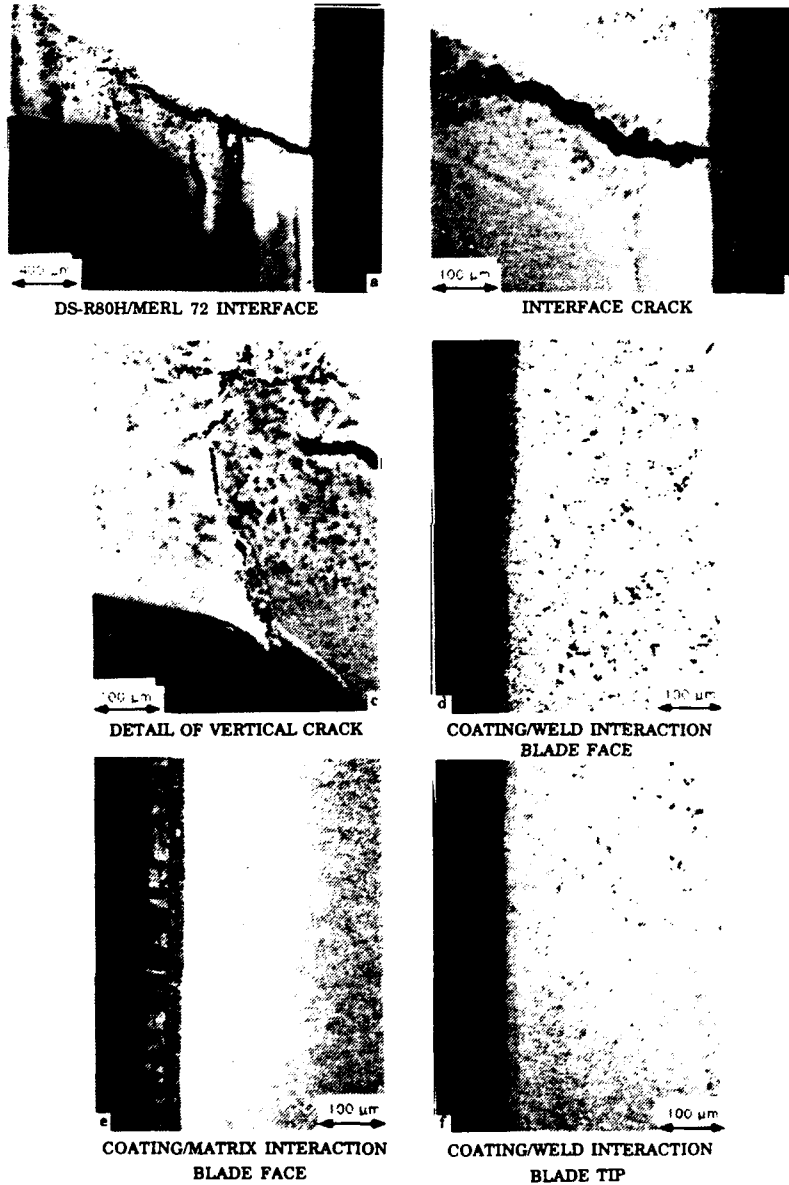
DS-R80H HPT Blade, ASMET engine tested, MERL 72 tip repaired by Chromalloy to original tip cooling scheme before engine test.
